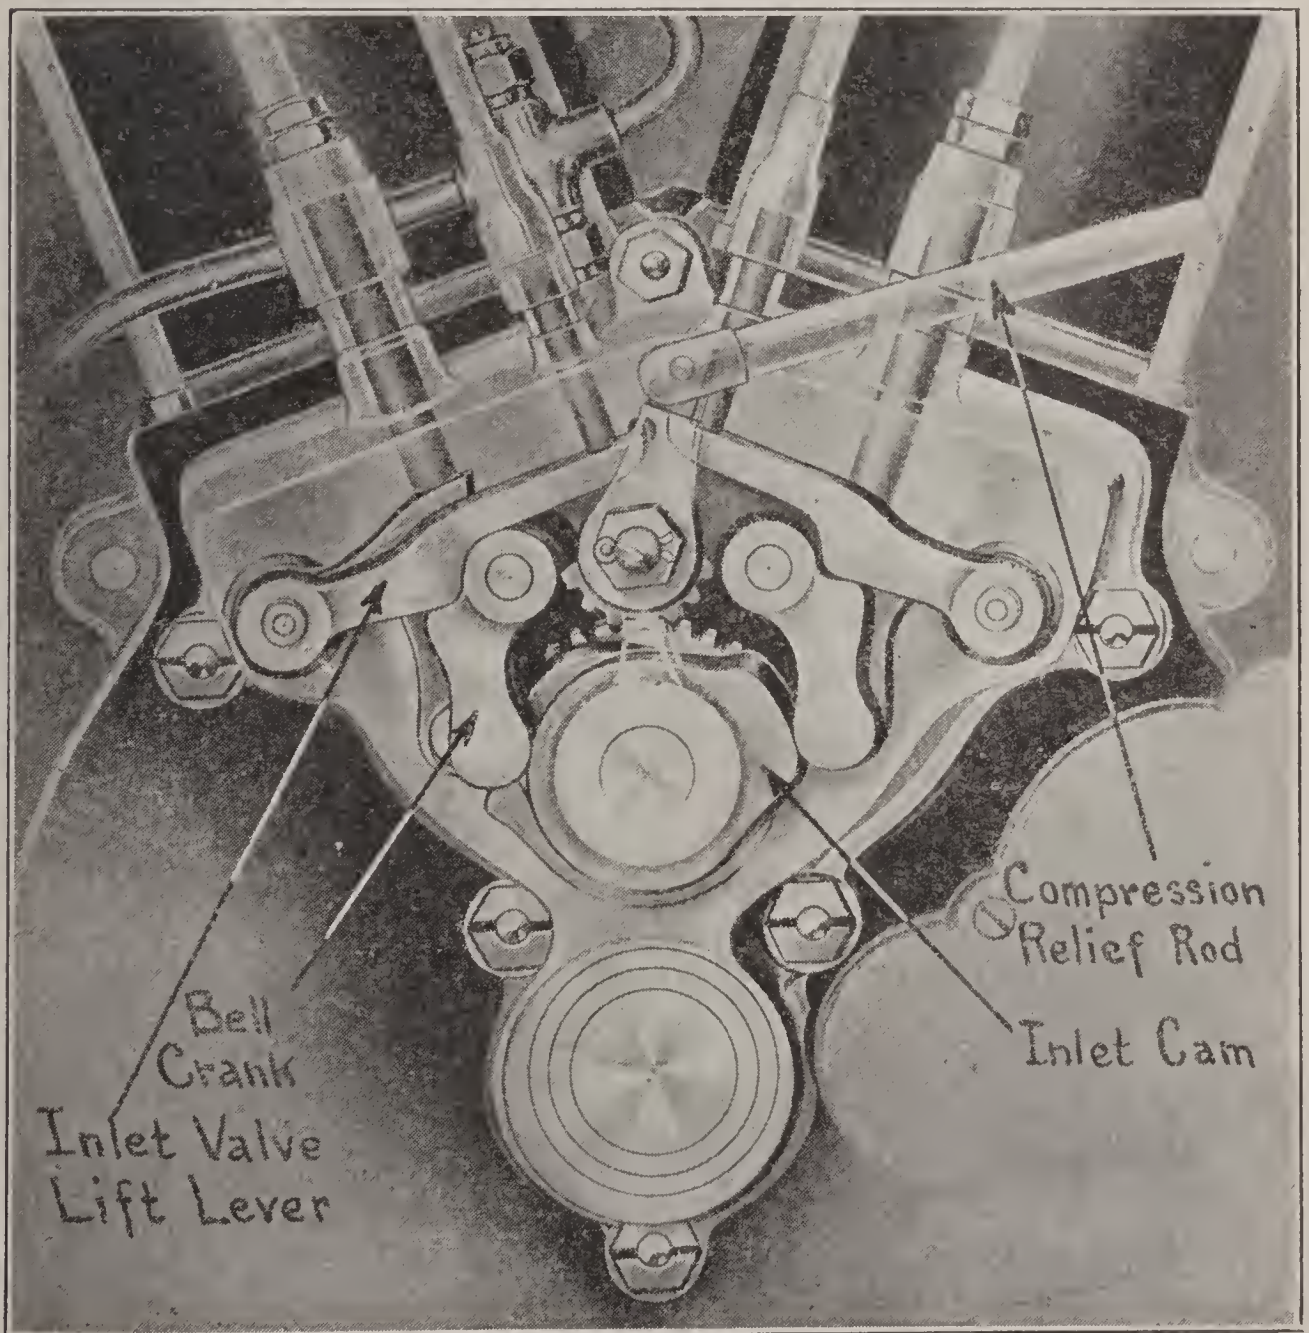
Valve Operating Mechanism of the Indian Twin Cylinder Motor.
